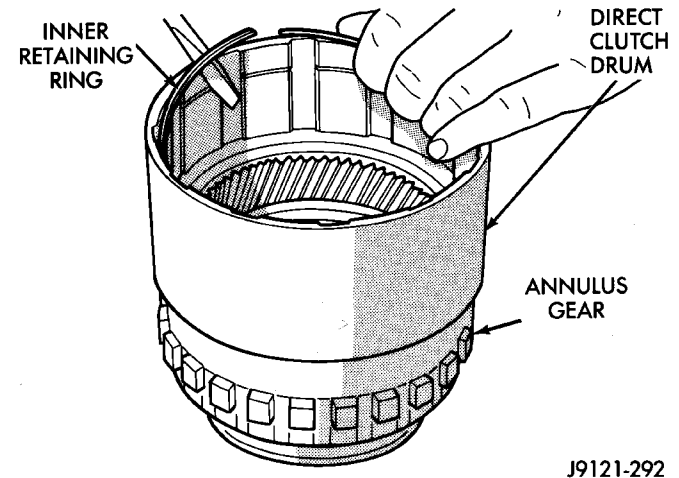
Clutch Drum Inner Retaining Ring Removal
